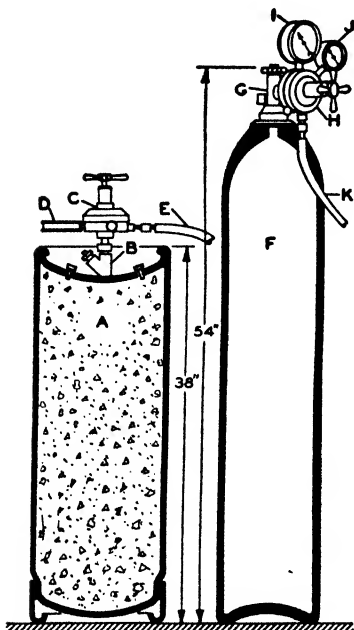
CYLINDERS AND REGULATORS FOR OXY-ACETYLENE WELDING
